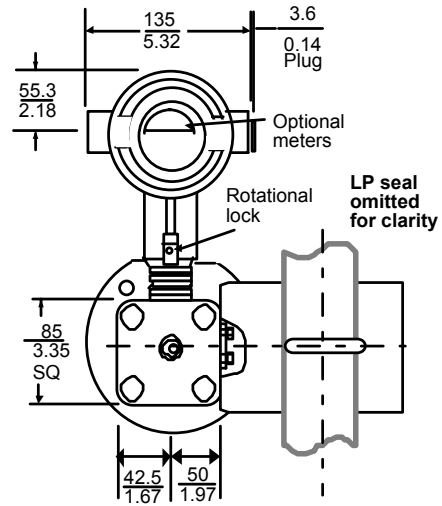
Approximate horizontal mounting dimensions for Remote Seal Transmitter.
